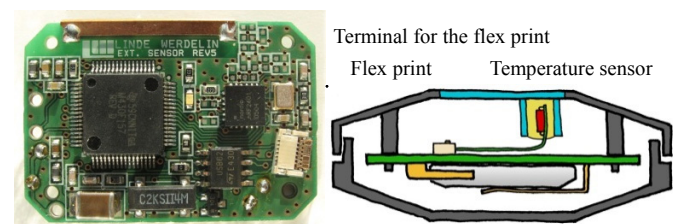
The PCB and the positioning of the flex print and the flex print terminal
